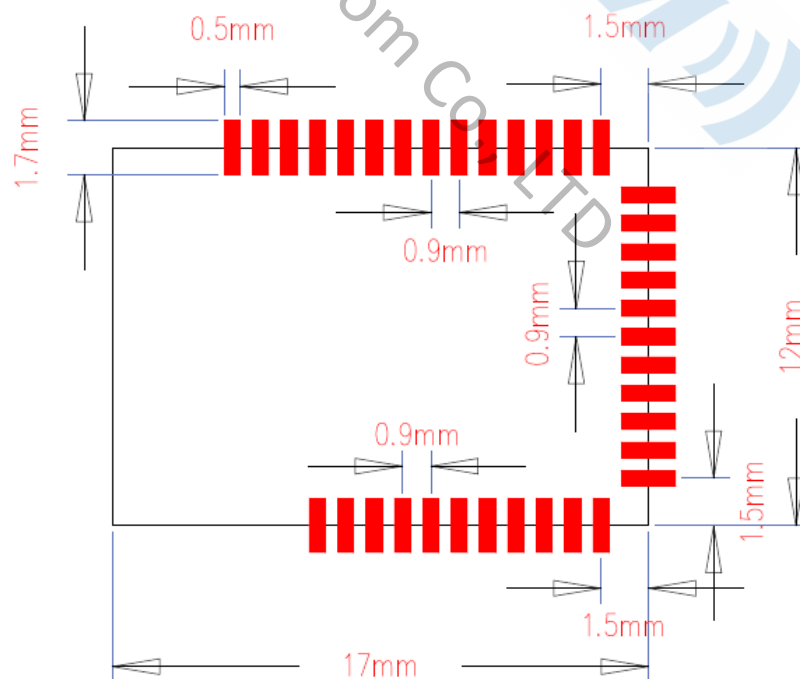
FSC-BT2064FI footprint Layout Guide (Top View)
